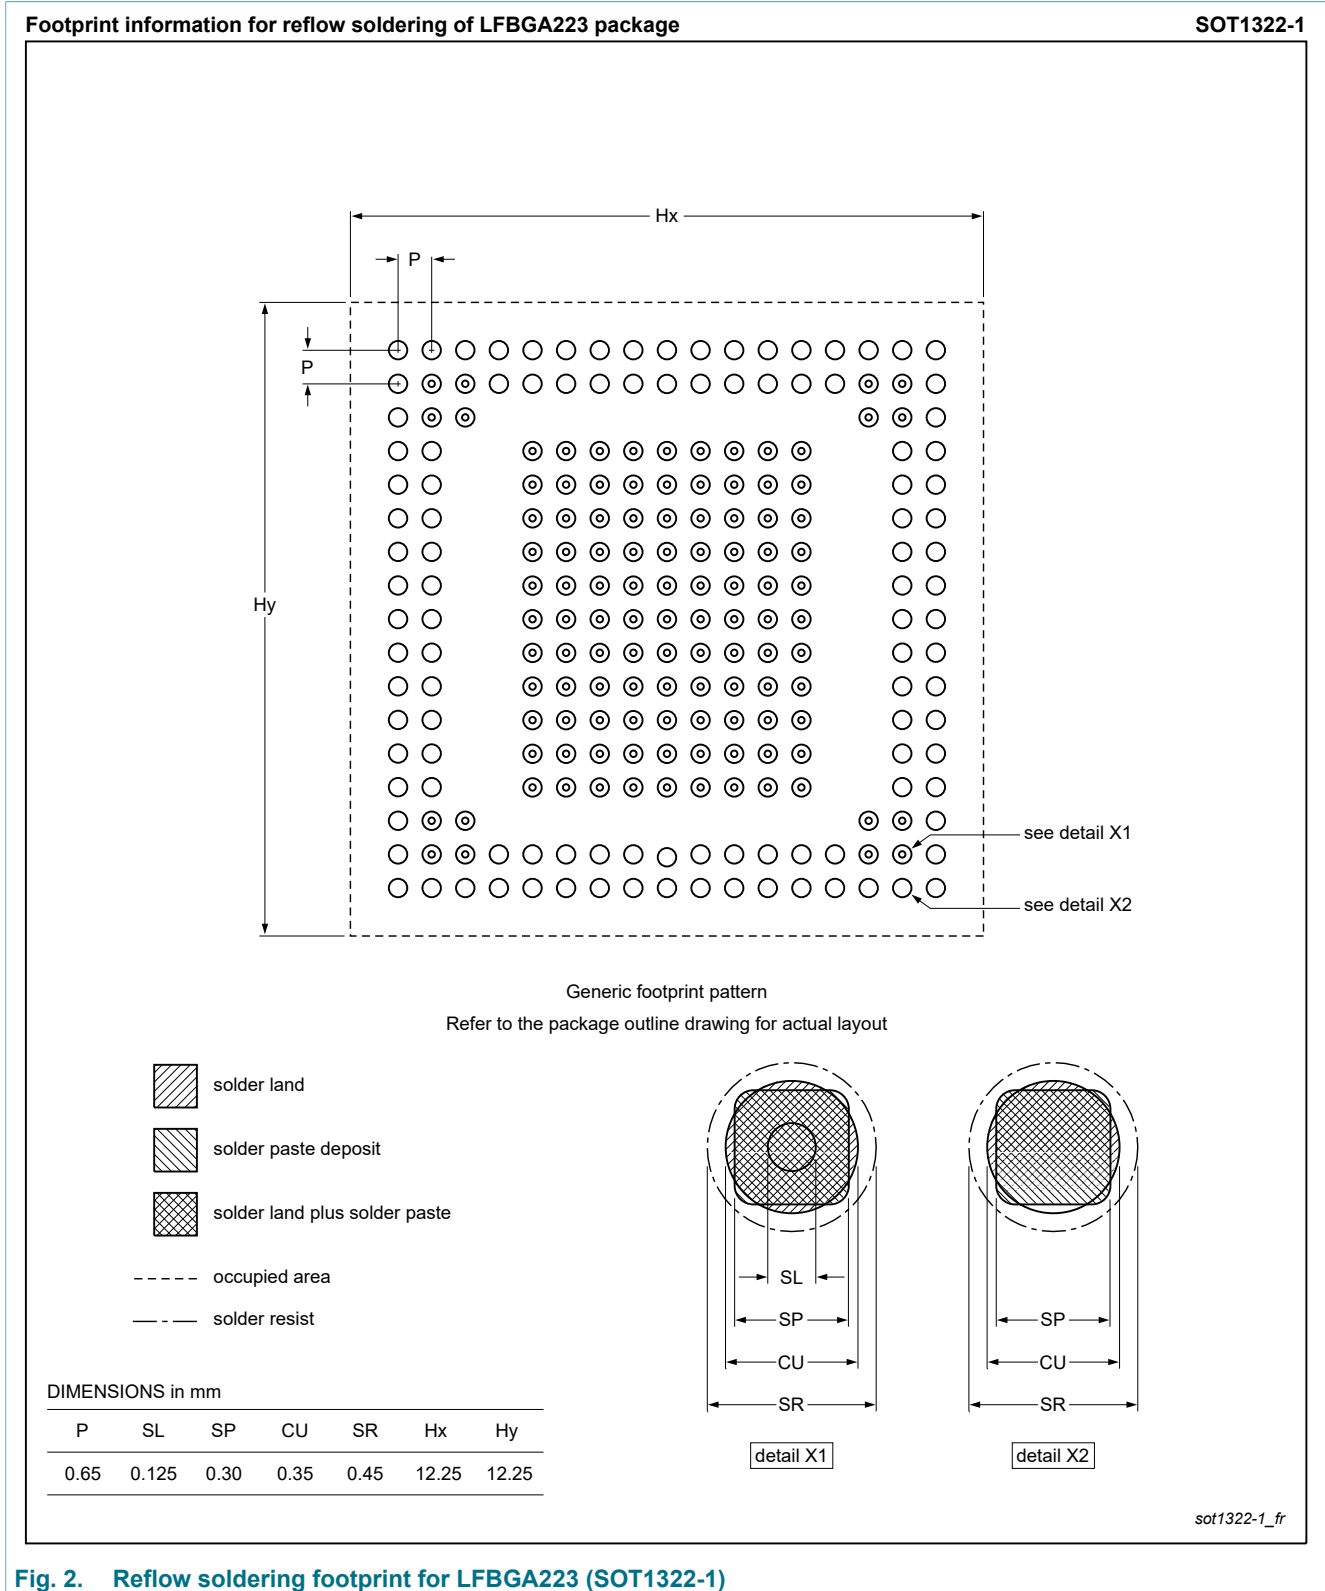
Reflow soldering footprint for LFBGA223 (SOT1322-1)
